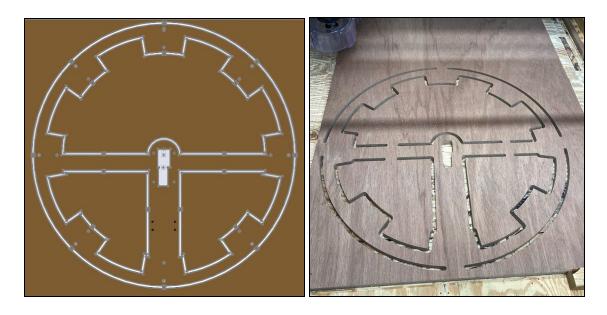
Side-by-side images of the center frame piece cut out using the CNC mill. On the left is a model of the part in SolidWorks, and on the right shows an image of the completed part
